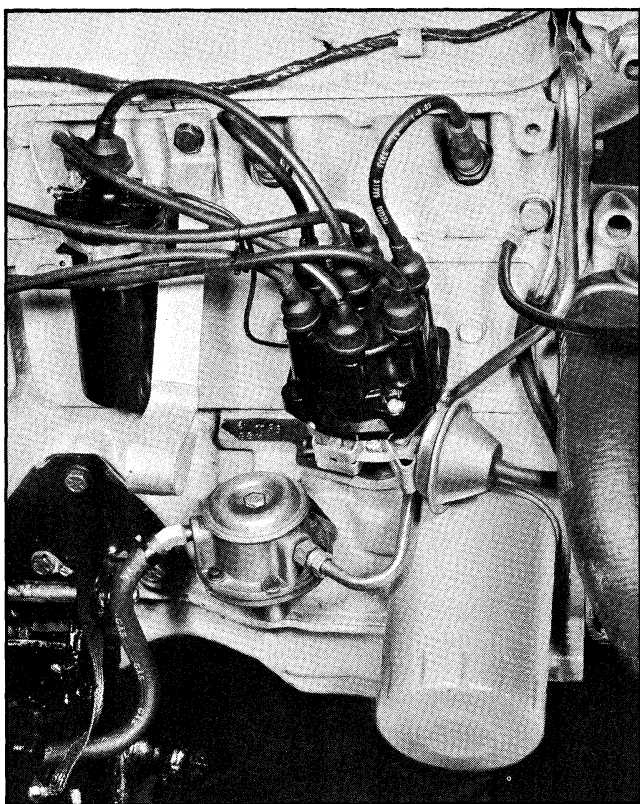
B-105 Fuel Pump Installed 6 Cyl.
